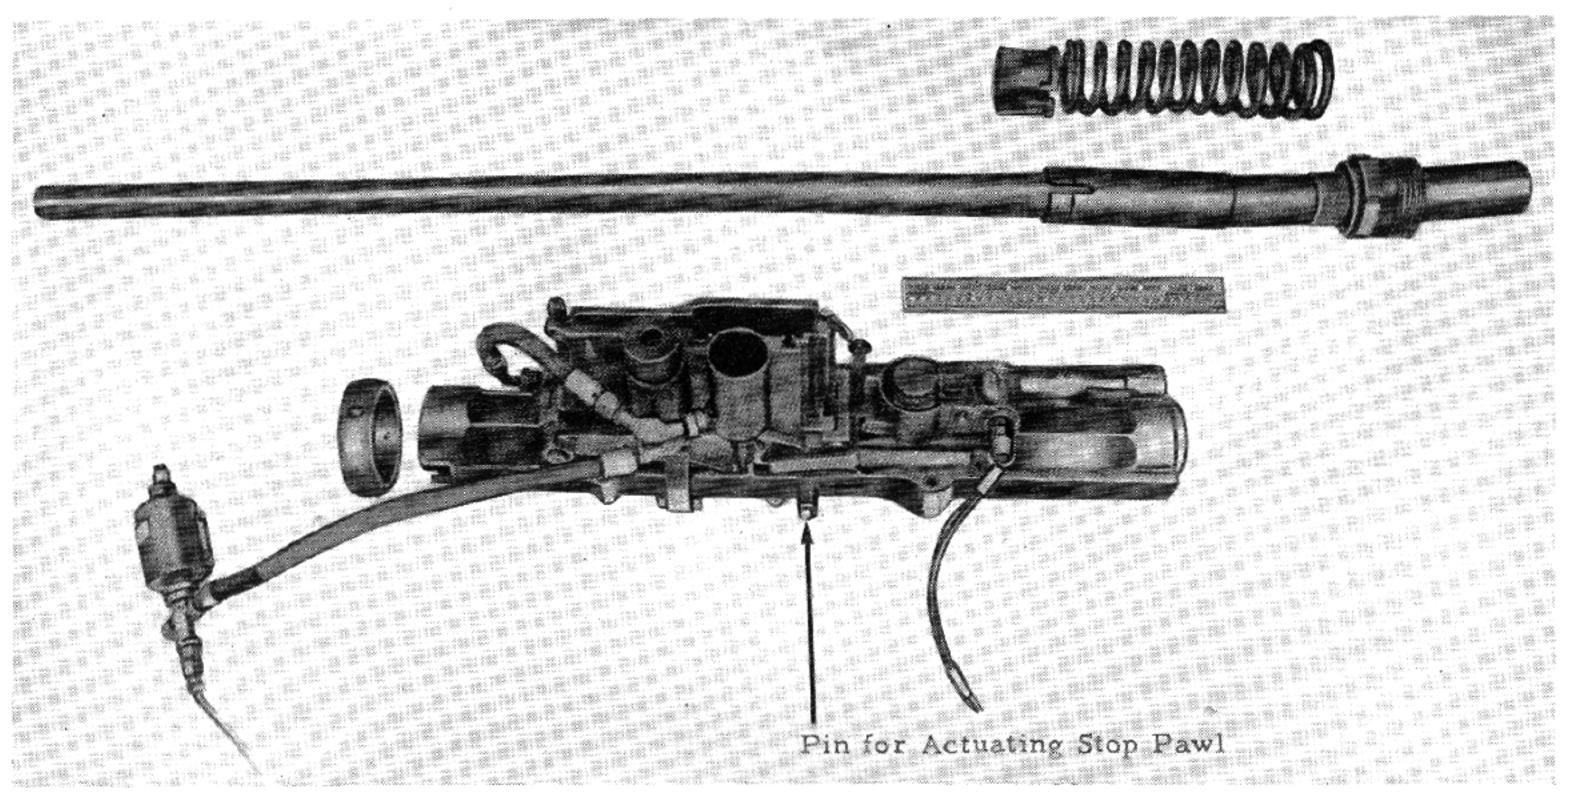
The two major assemblies of the 23–mm NS Gun.
